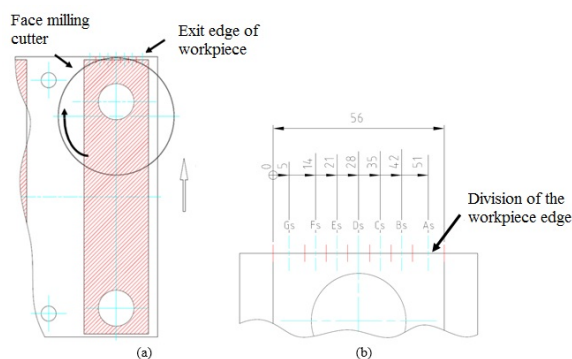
(a) Indication of machining direction; (b) Division of the workpiece edge in seven segments for burr height measurement.
